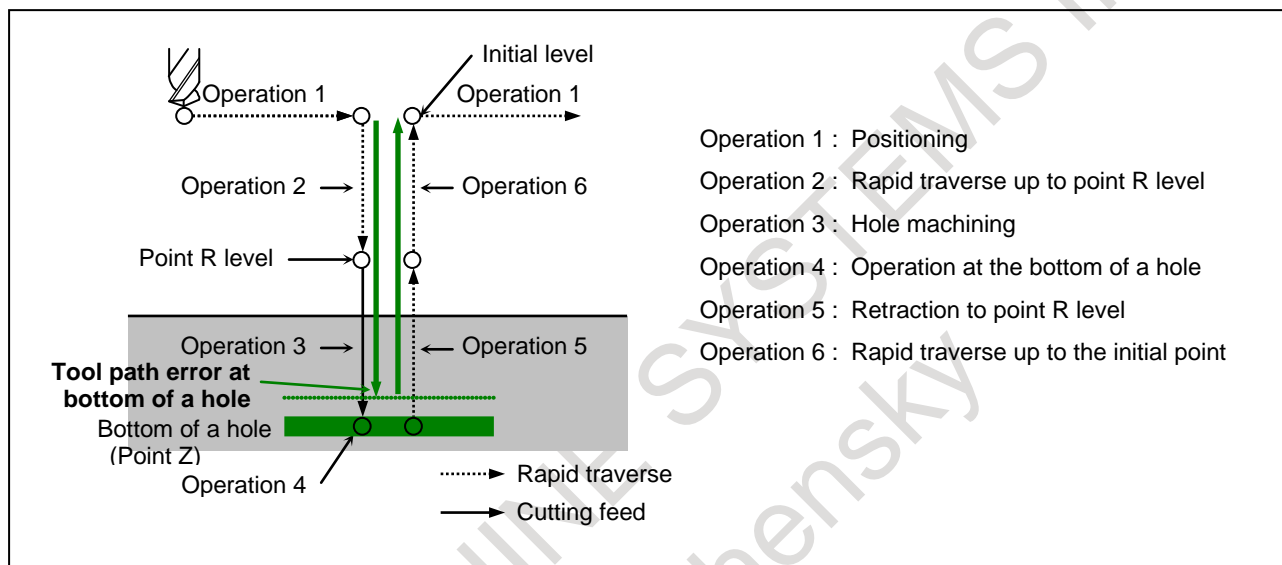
(f) Tool path error at bottom of a hole by overlap
